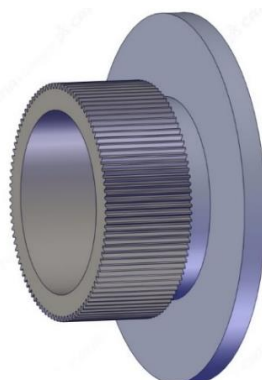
The planet gear with an extruded part where the distal part of the catheter can be fastened.
